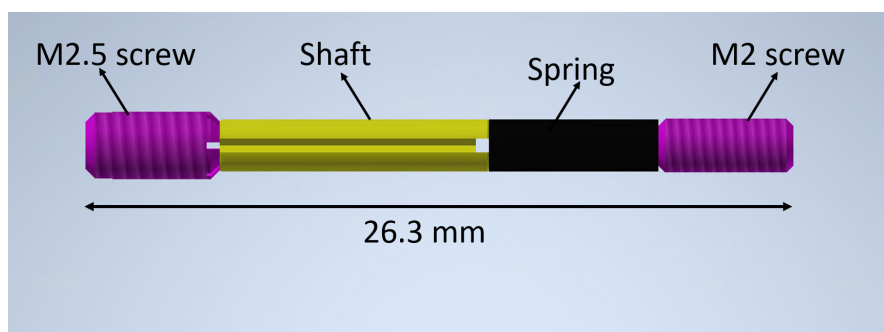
CAD drawing of the differential screw assembly used for positioning the extension rod.
